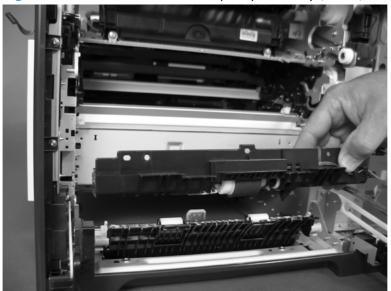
Remove the cassette pickup assembly (3 of 3)
